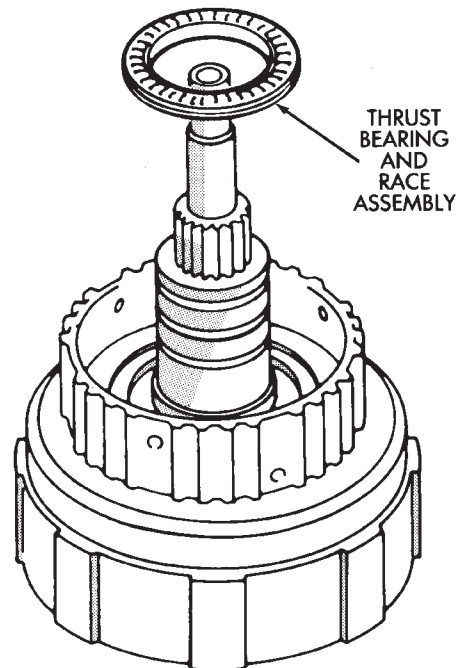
Removing Clutch Drum Thrust Bearing Assembly
